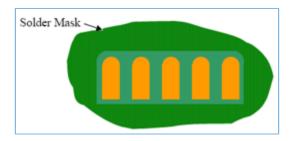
Solder mask definition for perimeter lands for 0.4 mm pitch parts
